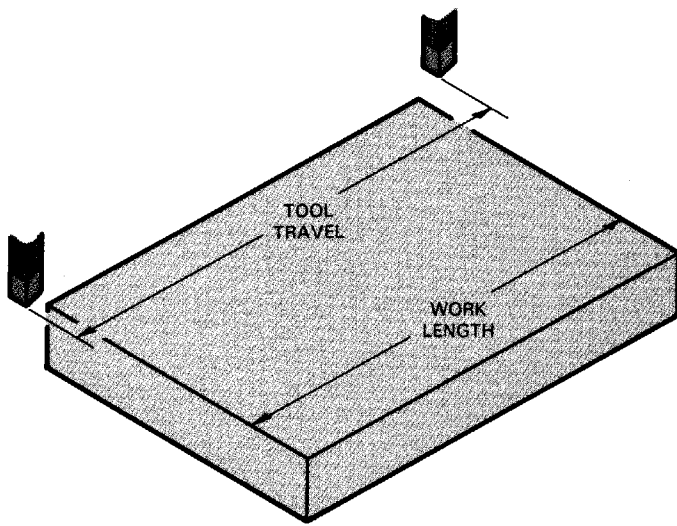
Shaper size is determined by maximum work length that can be machined in one pass.
